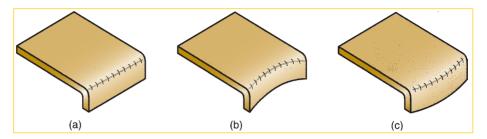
Flanging: (a) straight flanging, (b) stretch flanging, and (c) shrink flanging.
